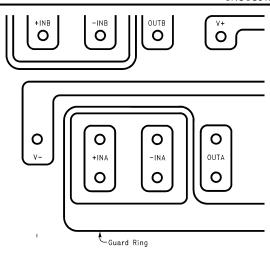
Example, Using the LMC660, of Guard Ring in PCB Layout
